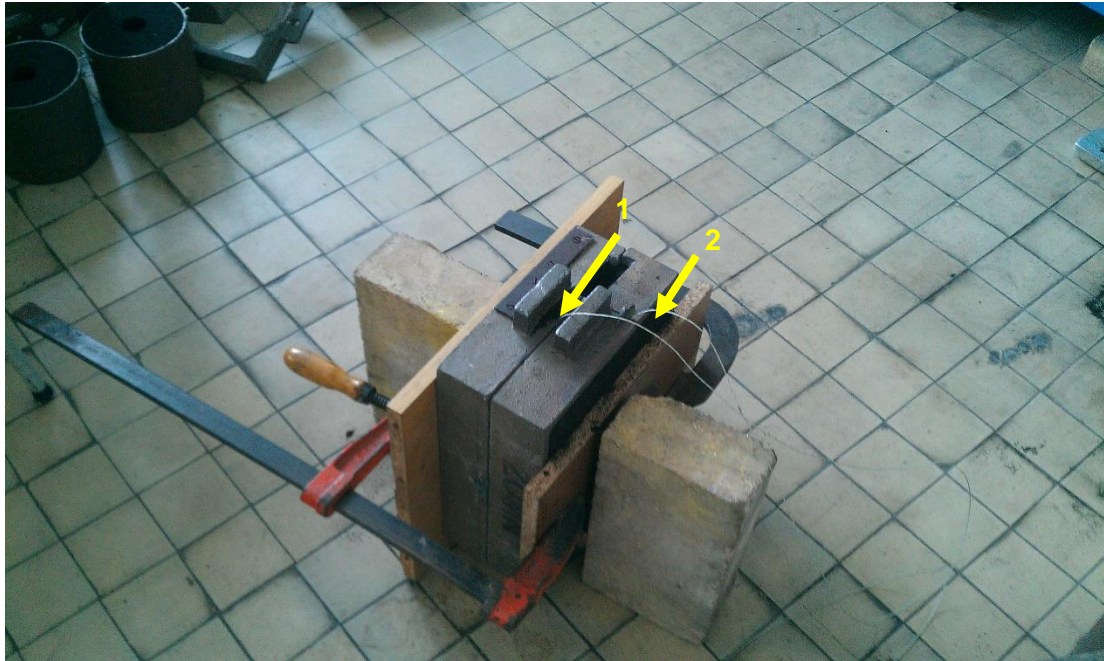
Assembled mould with thermocouples (1 – casting cavity; 2 – centre of inside mould)
